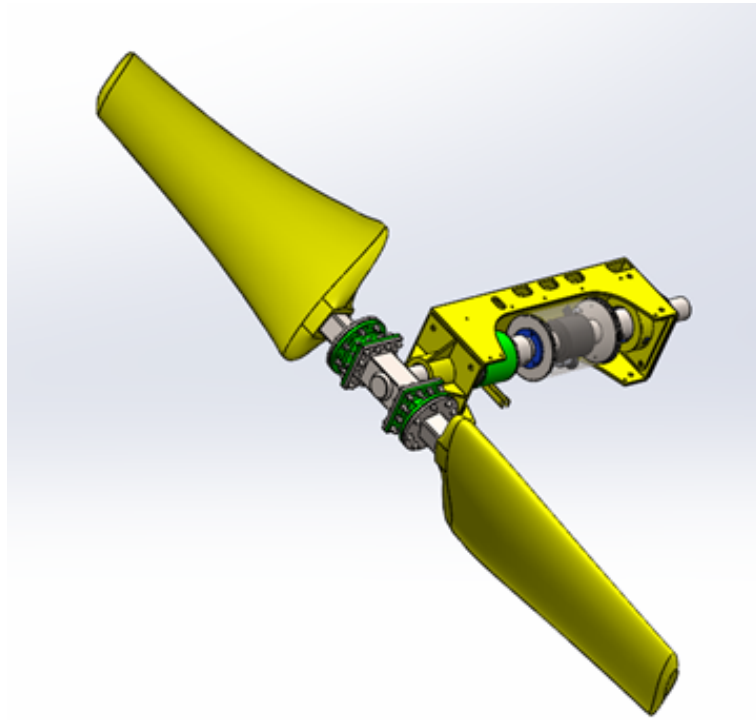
Isometric view of the RRES blade and hub assembly with the blade root strain housing coloured green.
